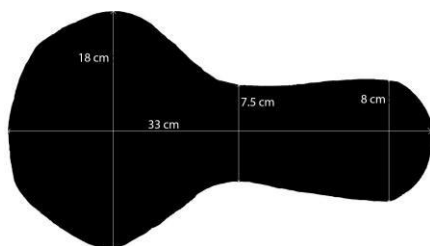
Gusset shape and dimensions (For a medium sized underwear)
